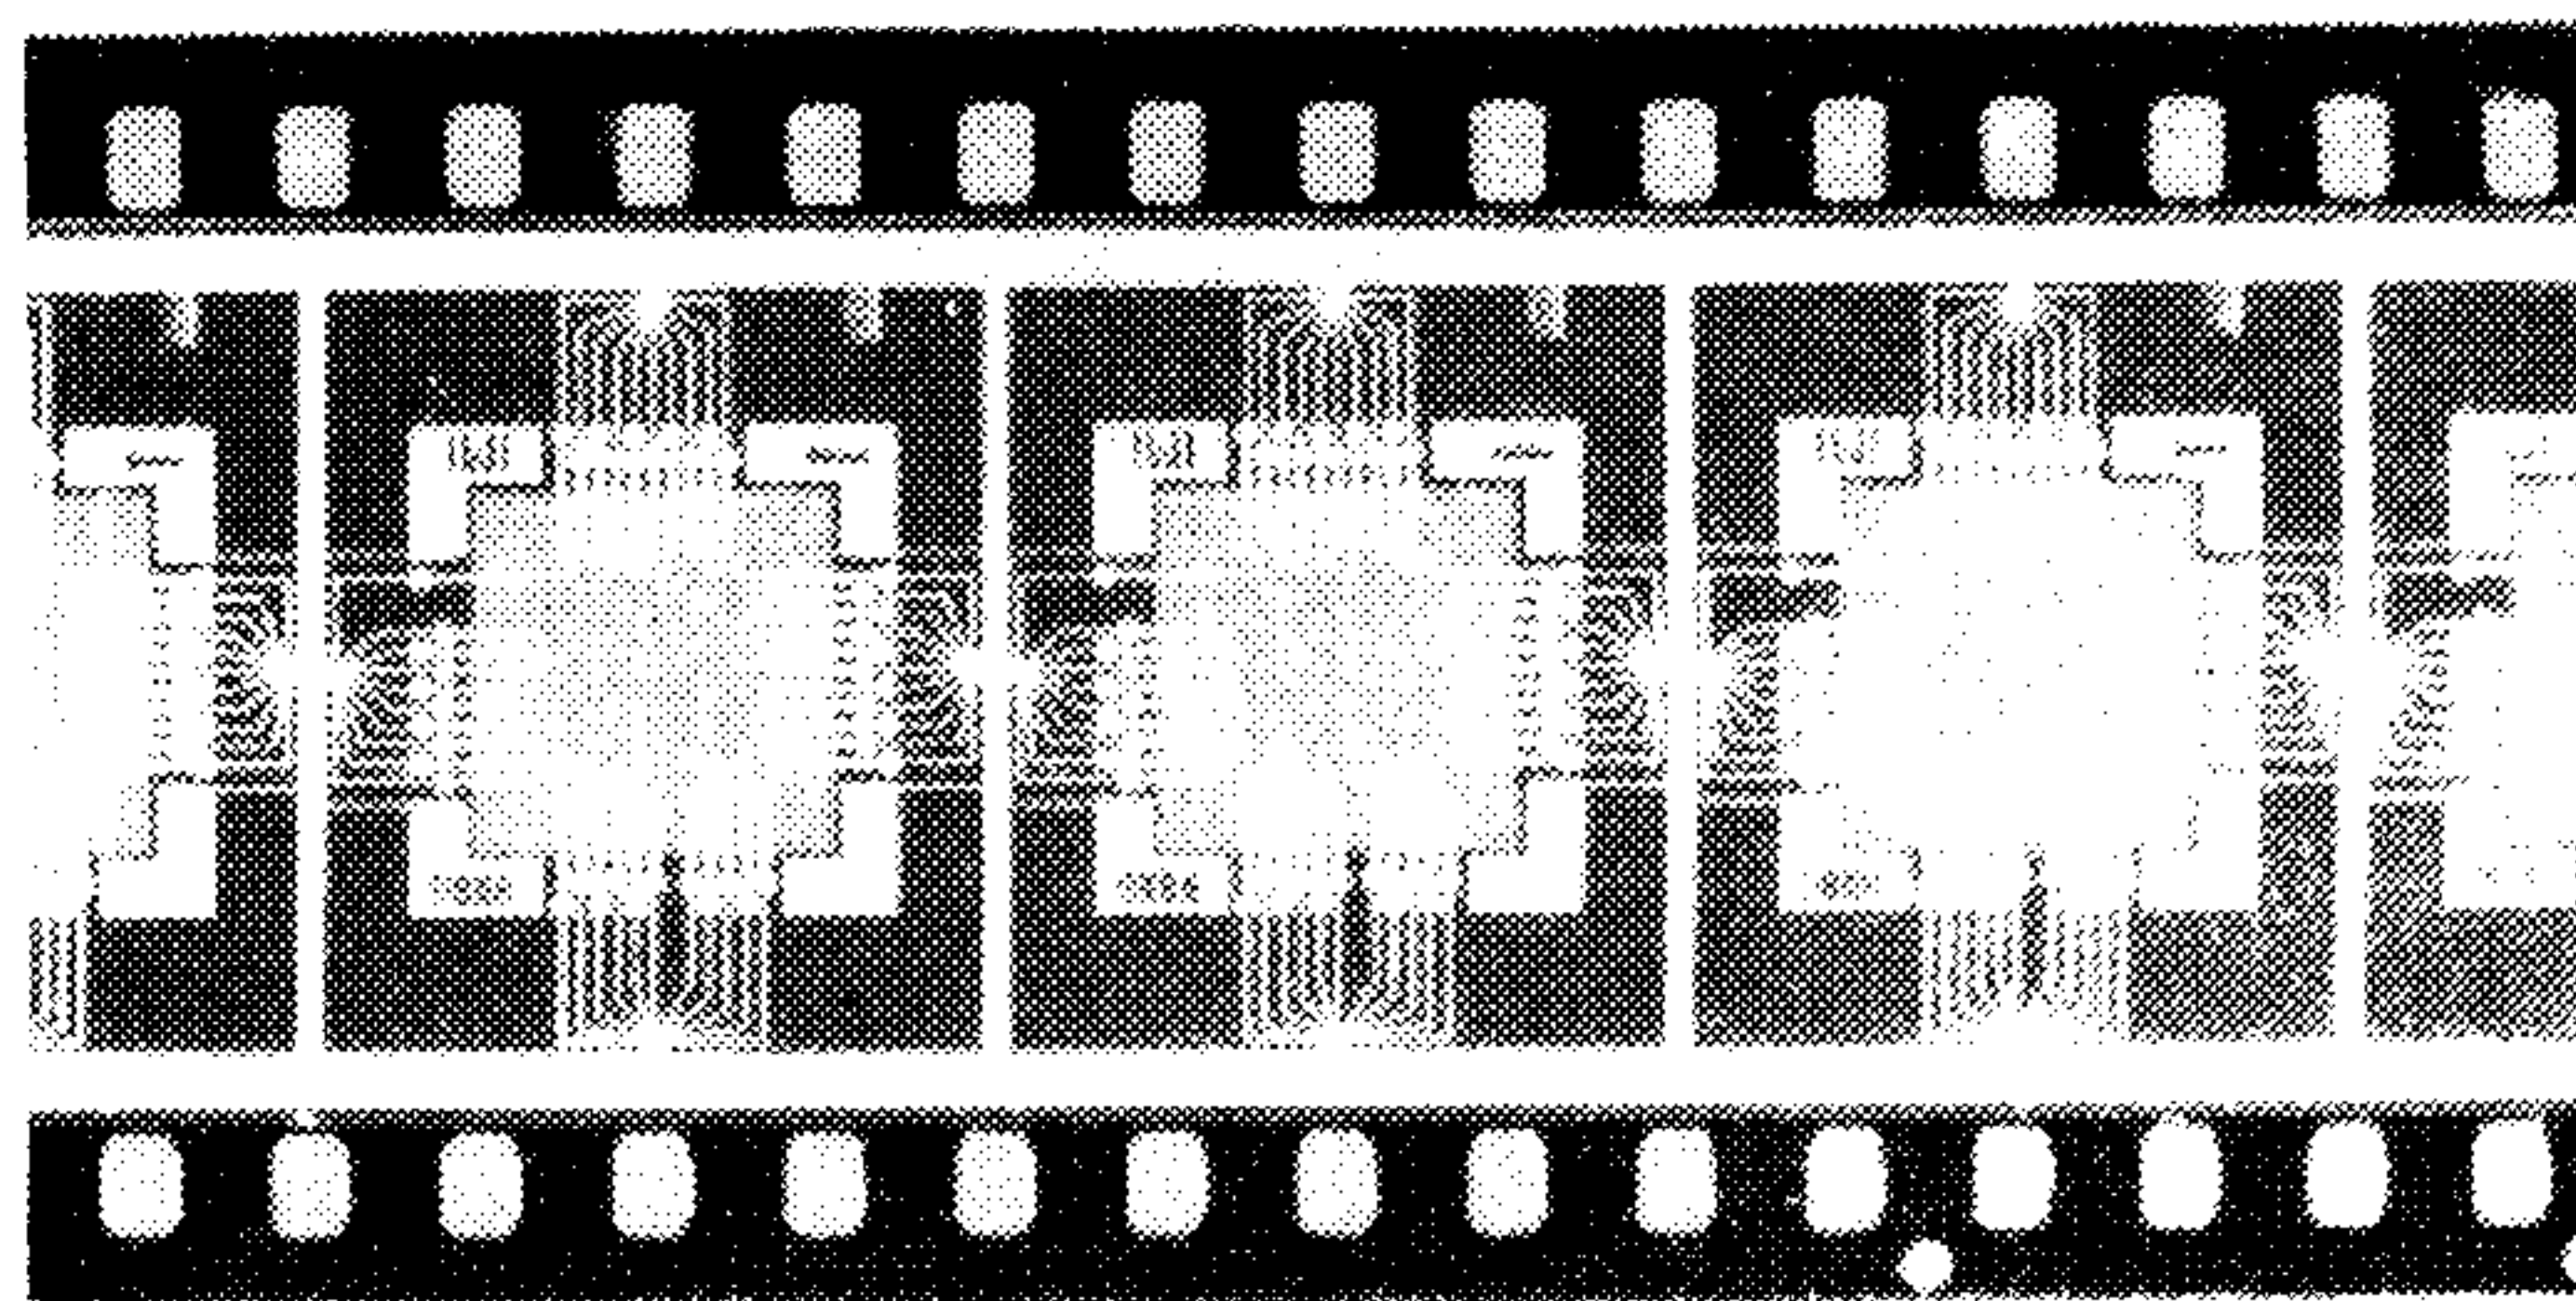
Sprocket holes in the polyimide tape are used to position the tape over the die.
